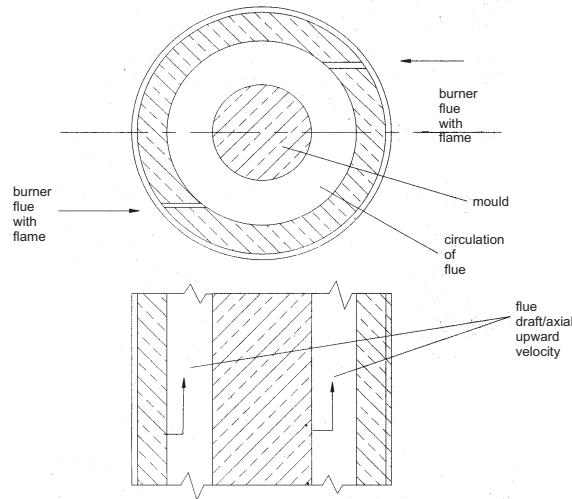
Sketch of furnace with mould [sectional views (plan & elevation)]
